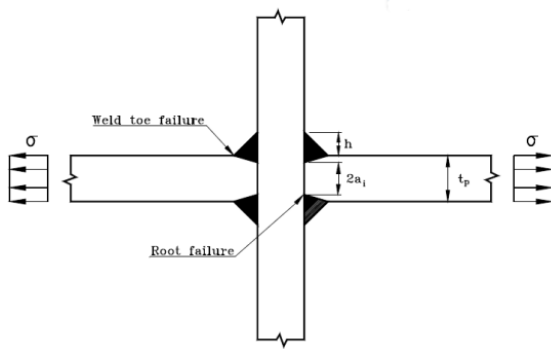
Weld parameters used to evaluate failure mode (DNV, 2012)
